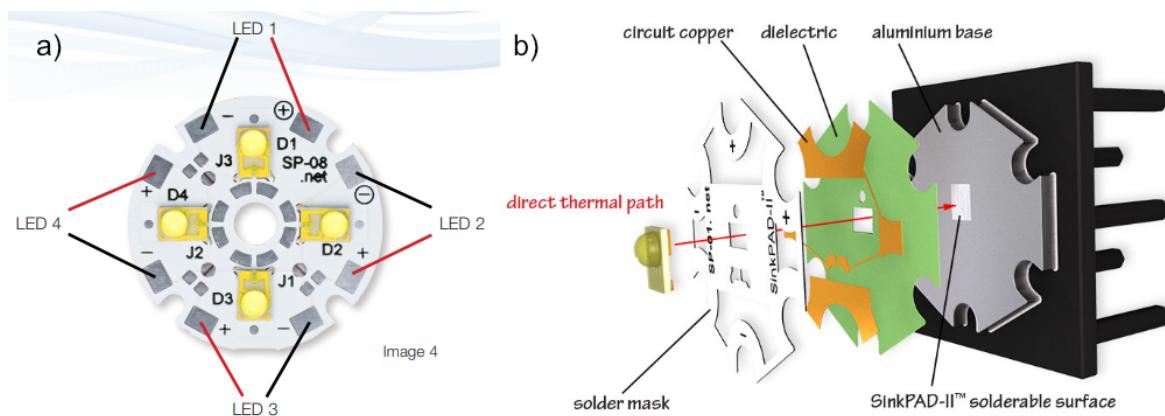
(a) Image of the SinkPAD-II™23mm Quad LED Module. (b) The assembly drawing of the SinkPAD-II™Technology. Reproduced from^[21].
